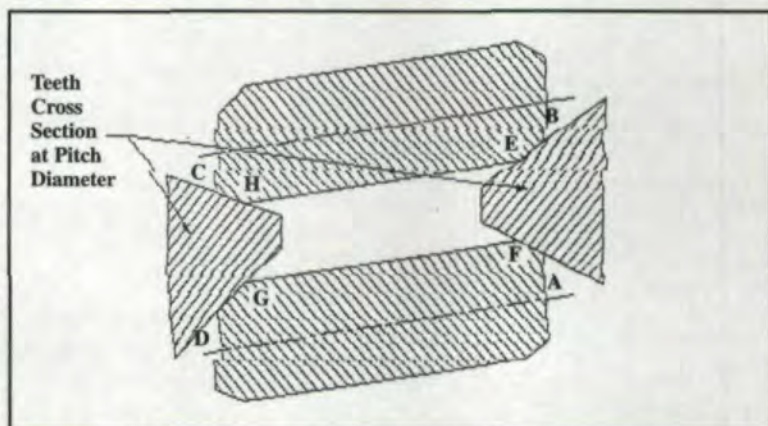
A cross section of gear and chamfering tool teeth in a rolling operation.
